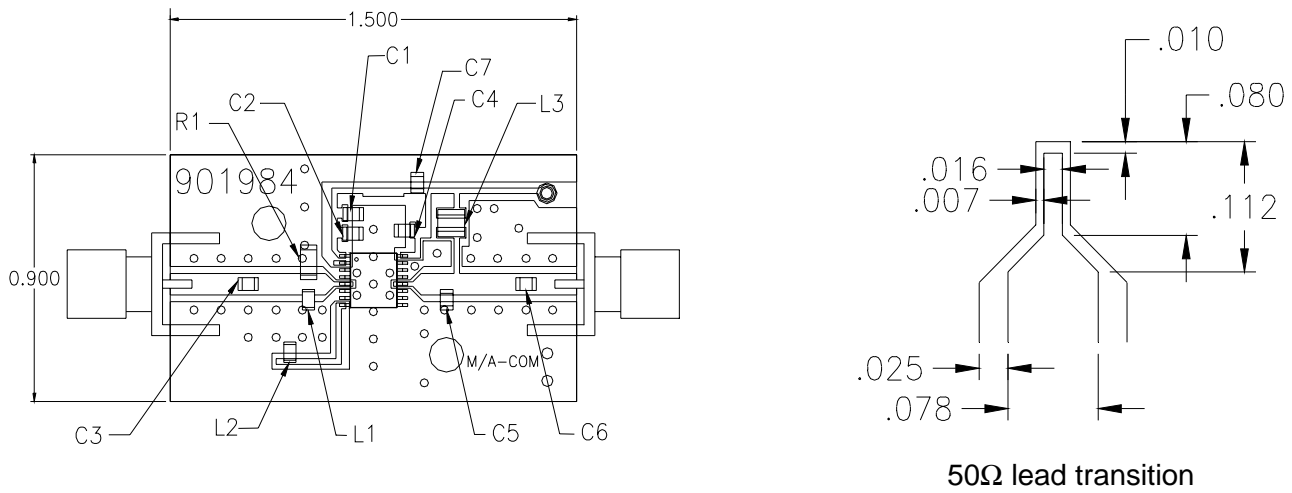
Component layout and printed circuit drawing for evaluation board (units in inches)
